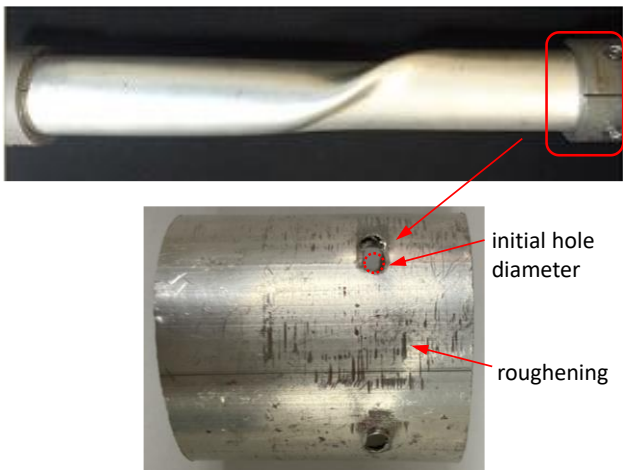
Roughening of the tube surface (as a result of sliding) and deformation of the screw holes in the screw clamp/friction assembly (This surface is under the steel ring)
